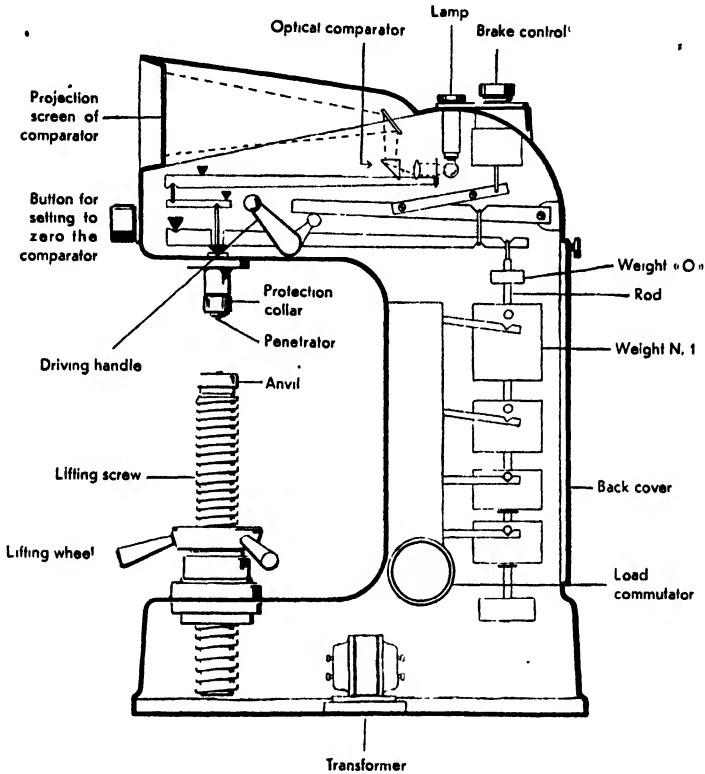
THE GALILEO DIRECT-READING HARDNESS TESTING MACHINE
